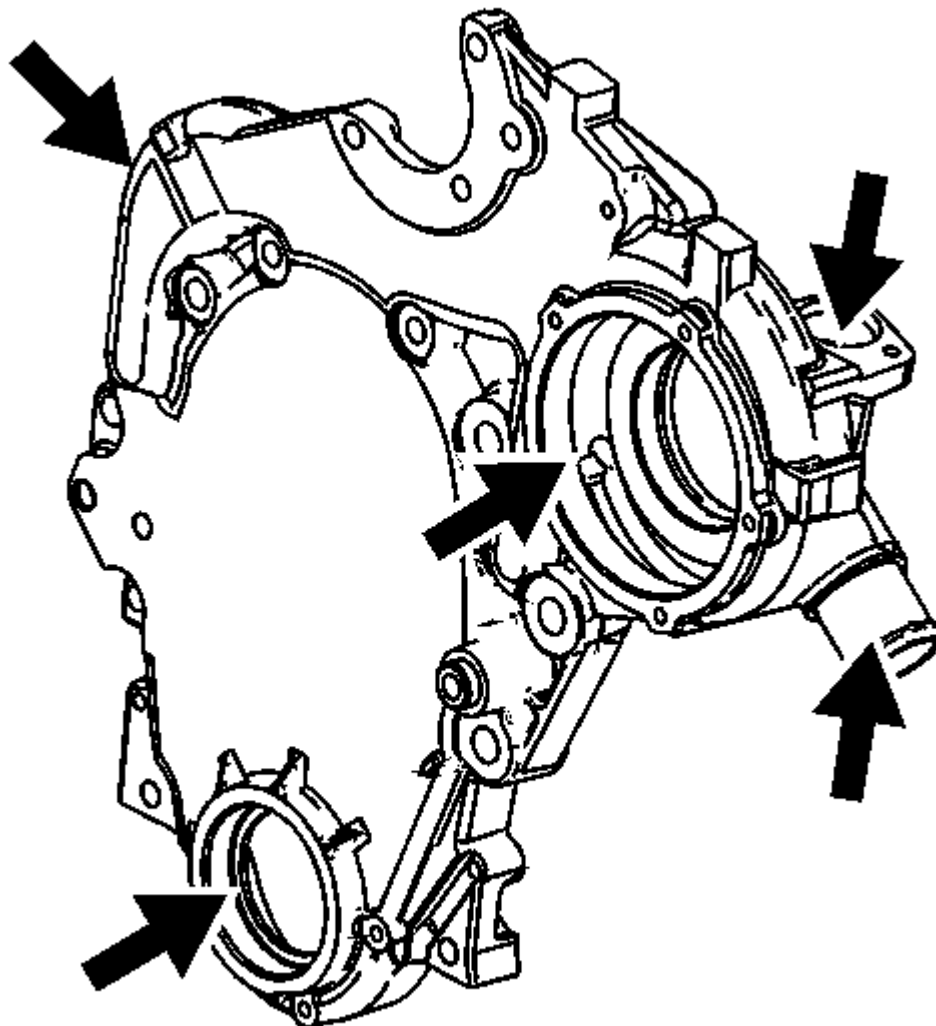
View Of Engine Front Cover Cleaning & Inspection Points
